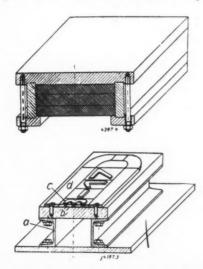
Rubber Pad for the Stamping of Metal Letters (a) Steel Sections; (b) Base Plate; (c) Exchangeable Stencils, (d) Exchangeable Stencils for the Size of Board
